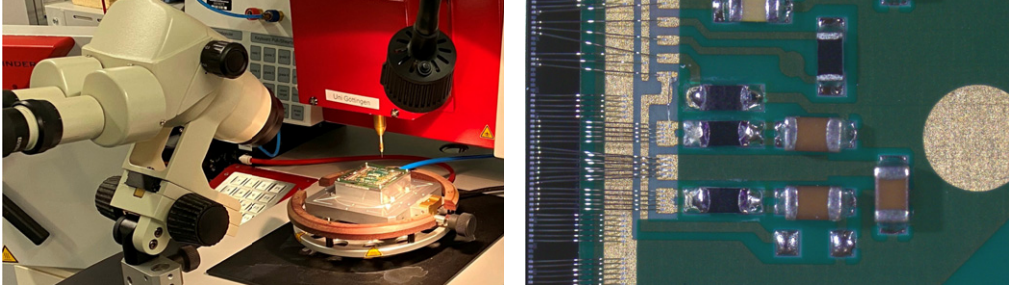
Inspection of wire bonds and pull tests with the pull head on a wire bonding machine.
